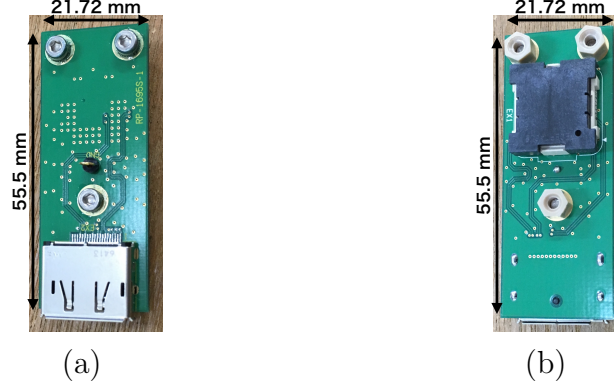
Adapter attached the RECBE board for the trigger system. On the front side, (a), a DP is mounted. On the back side, (b), an HFBR-7934 is mounted to be attached to the RECBE.
